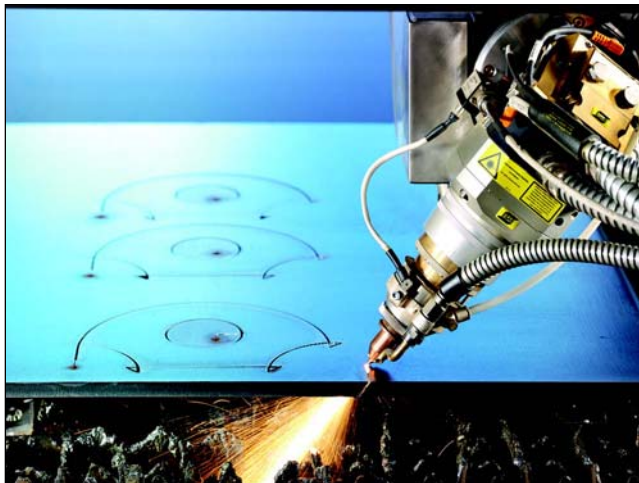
Mechanized Laser Cutting of Aluminum Plate
